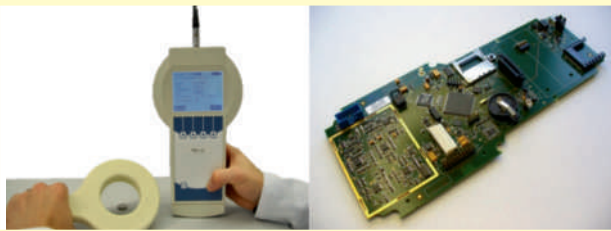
Mobile reader device with antenna handle (left); Main-PCB of the mobile reader (right)
